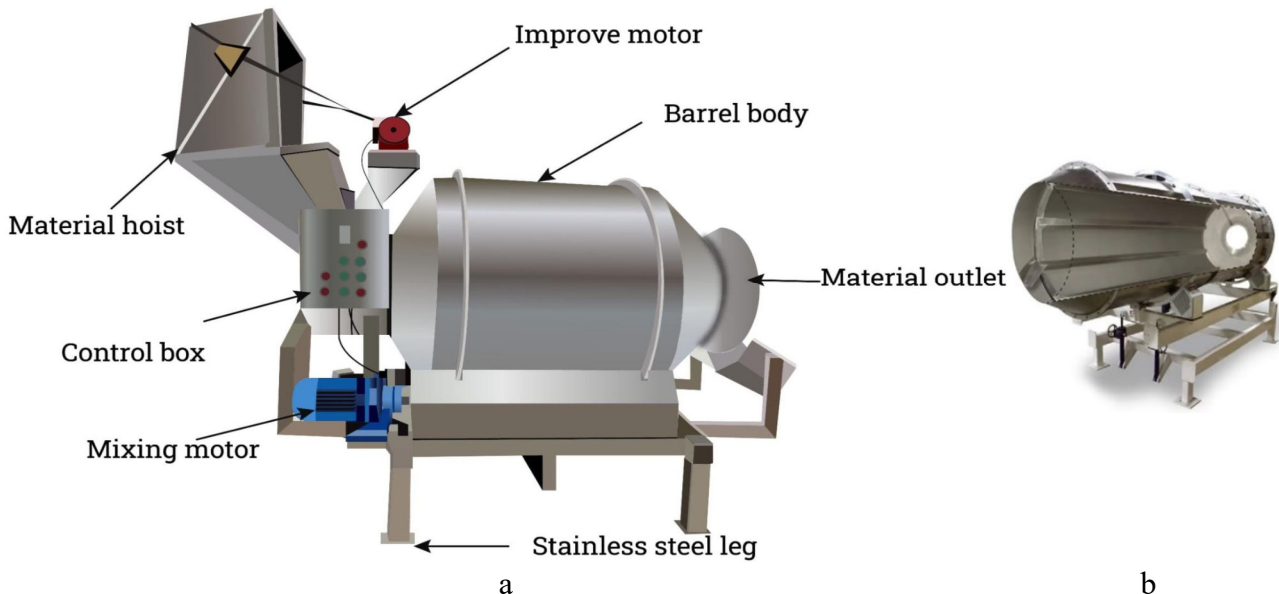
Drum mixer: a – general view, b – section of the working chamber
